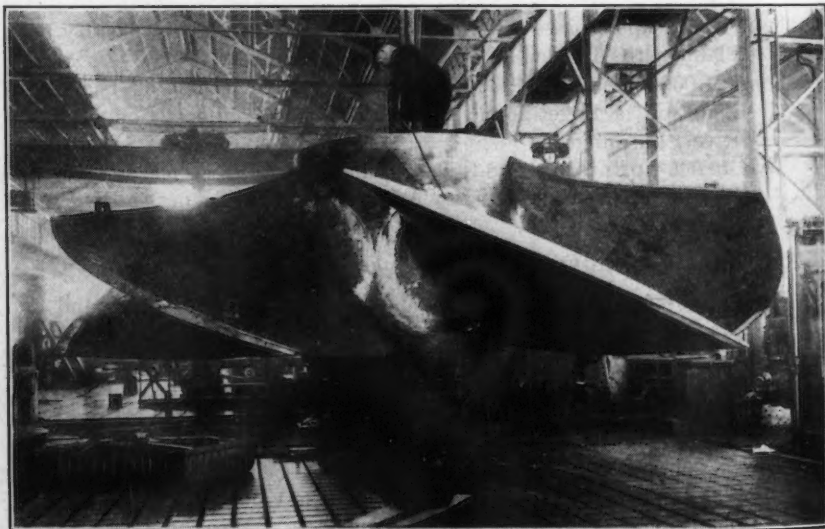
SHOP ASSEMBLY OF 22-FOOT FIXED-BLADE PROPELLER RUNNER FOR 45 000-Hp, WHEELER DAM TURBINE
